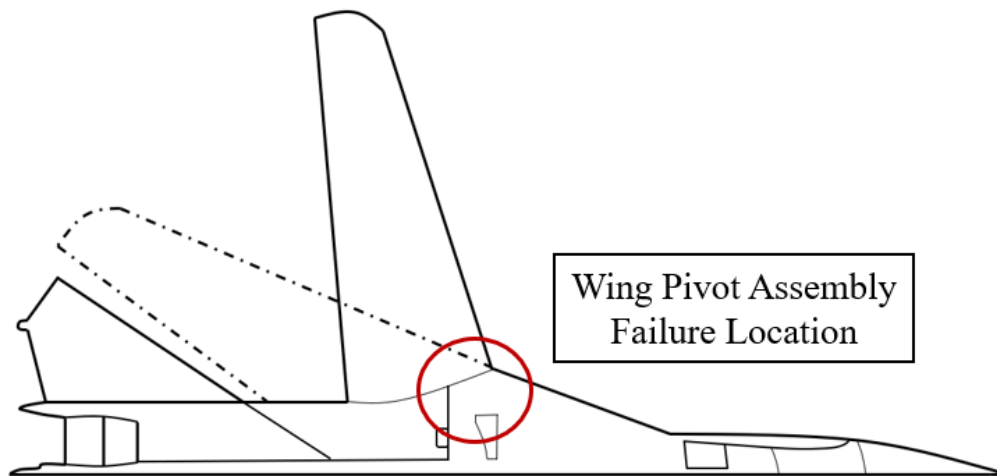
F-111 Wing Pivot Fitting Failure Location.
